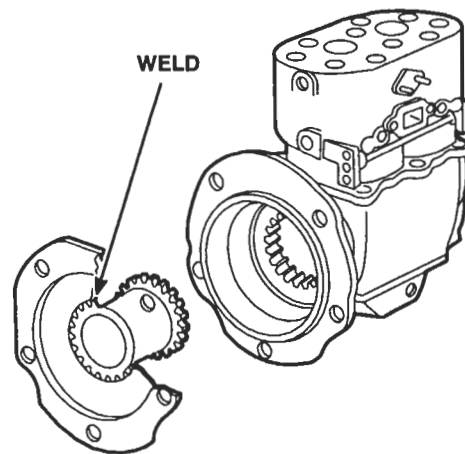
Fixture for Holding Drive while Installing or Removing Slotted Nut
